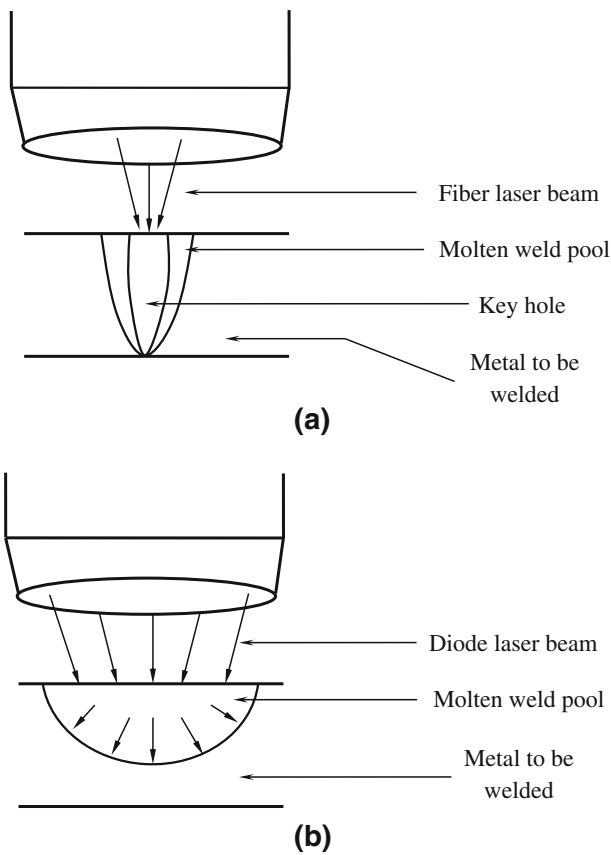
Schematic illustration of (a) keyhole and (b) conduction modes during laser welding.
